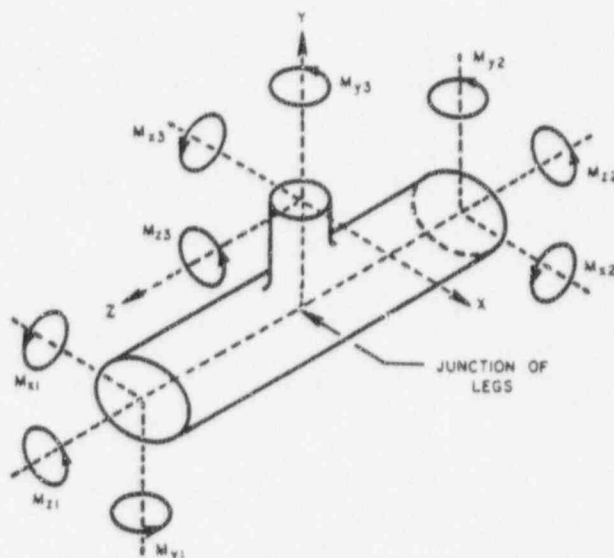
REDUCING OR FULL OUTLET BRANCH CONNECTIONS OR TEES
